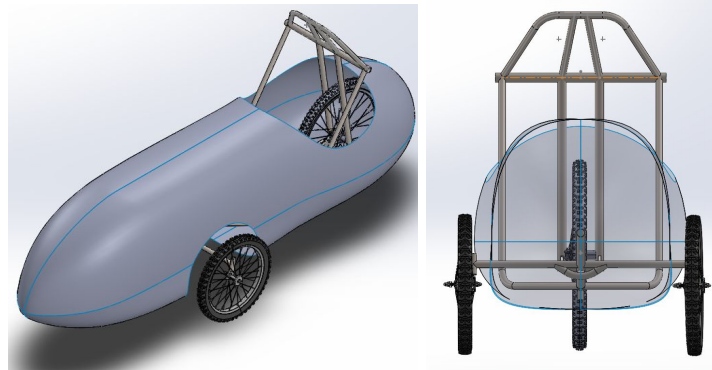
Isometric (left) and front (right) views of final fairing design
